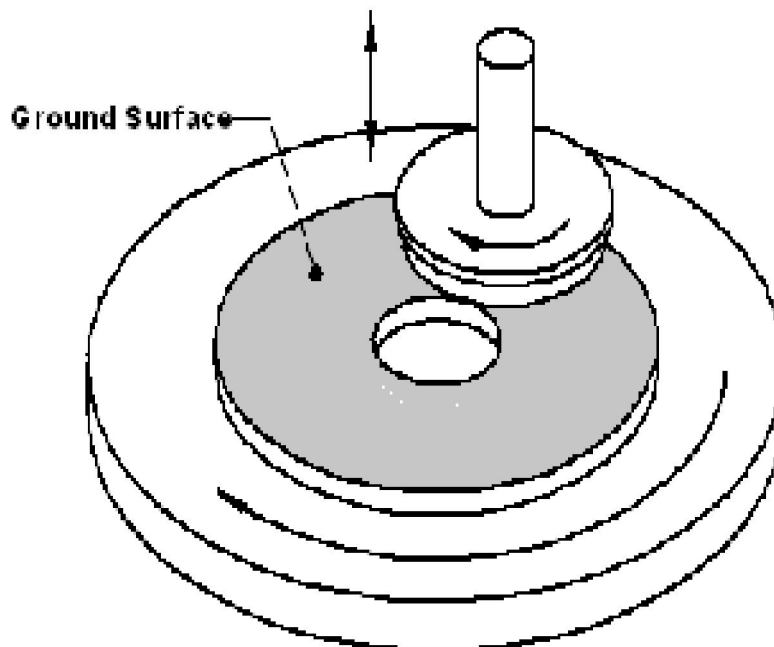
Vertical-Spindle Rotary Table Surface Grinding
